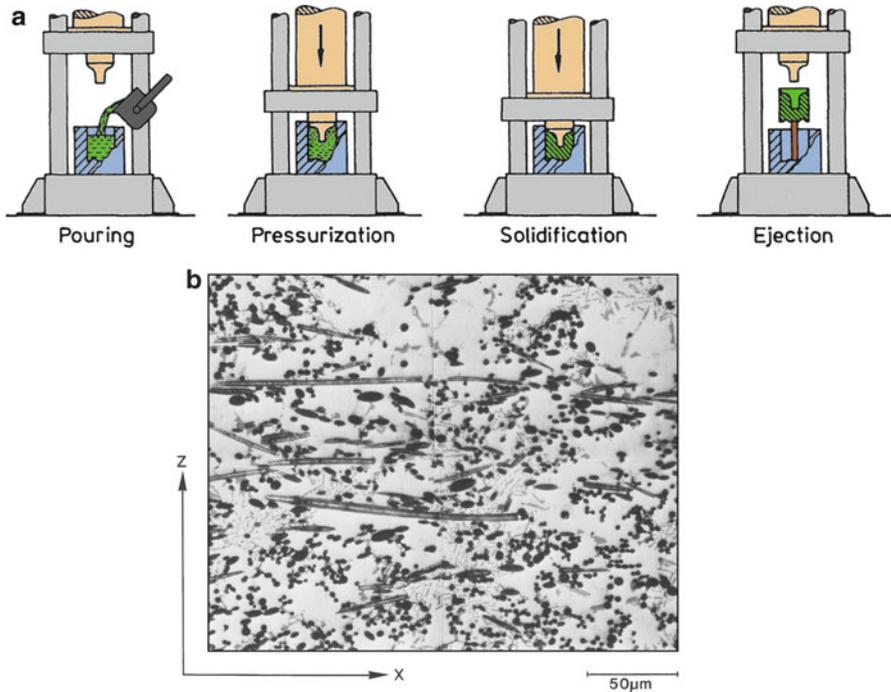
(a) Squeeze casting technique of making a metal matrix composite. (b) The microstructure of Saffil alumina fiber/aluminum matrix composite made by squeeze casting. [Courtesy of G. Eggeler]
